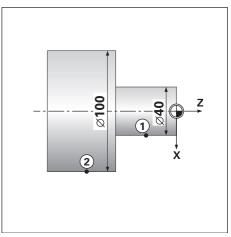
Workpiece drawing for the example on Oversizes. Tool positions without oversize or undersize
